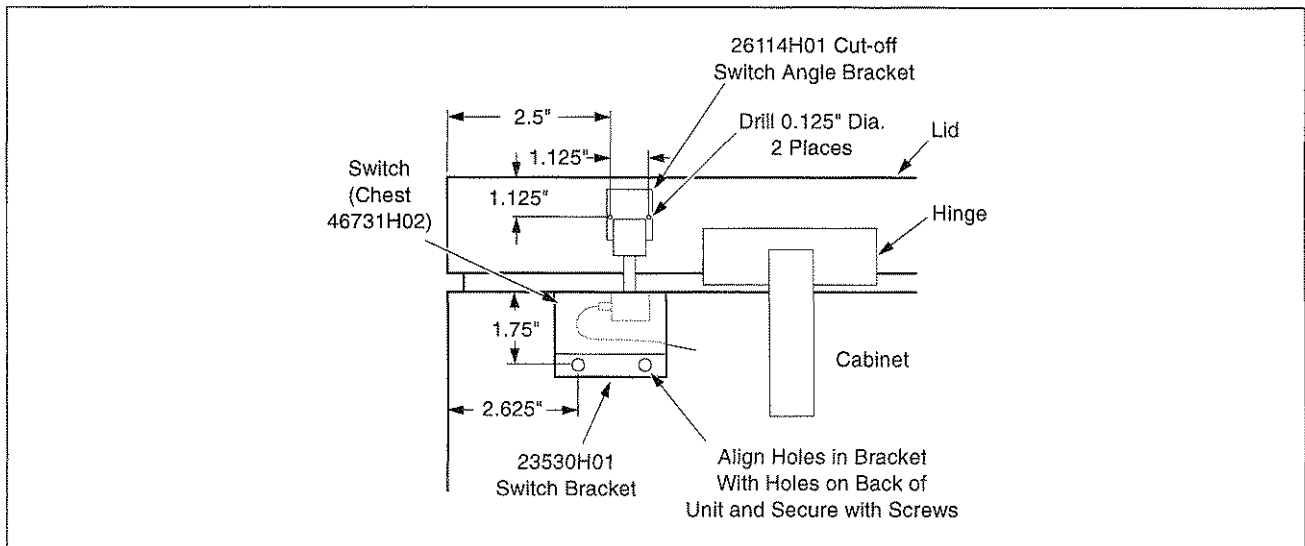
Positioning Switch Brackets on 390 and 590 with Bracket Location Holes on Back of Cabinet
